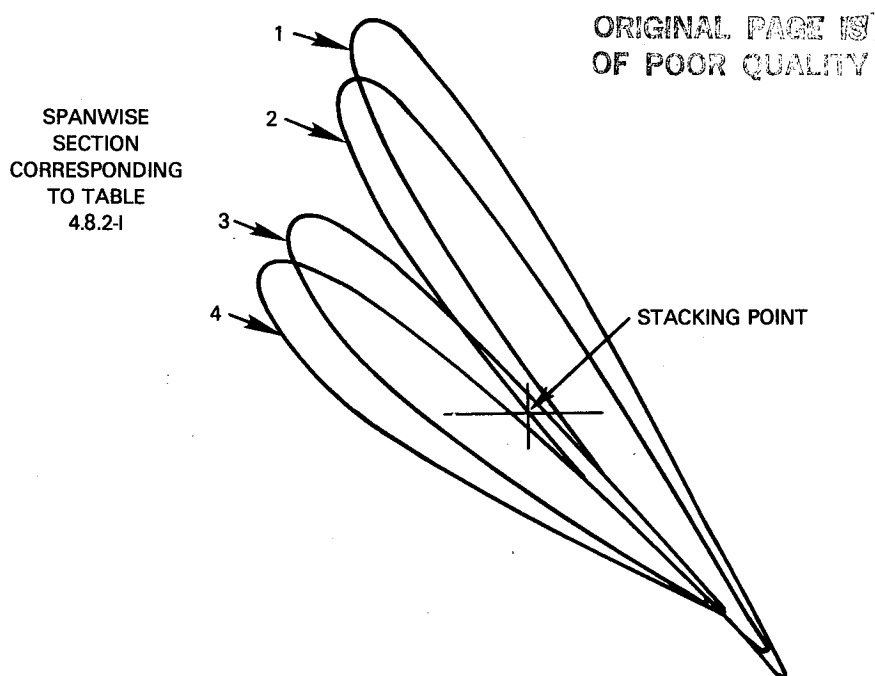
Strut Fairing Stacking Arrangement
